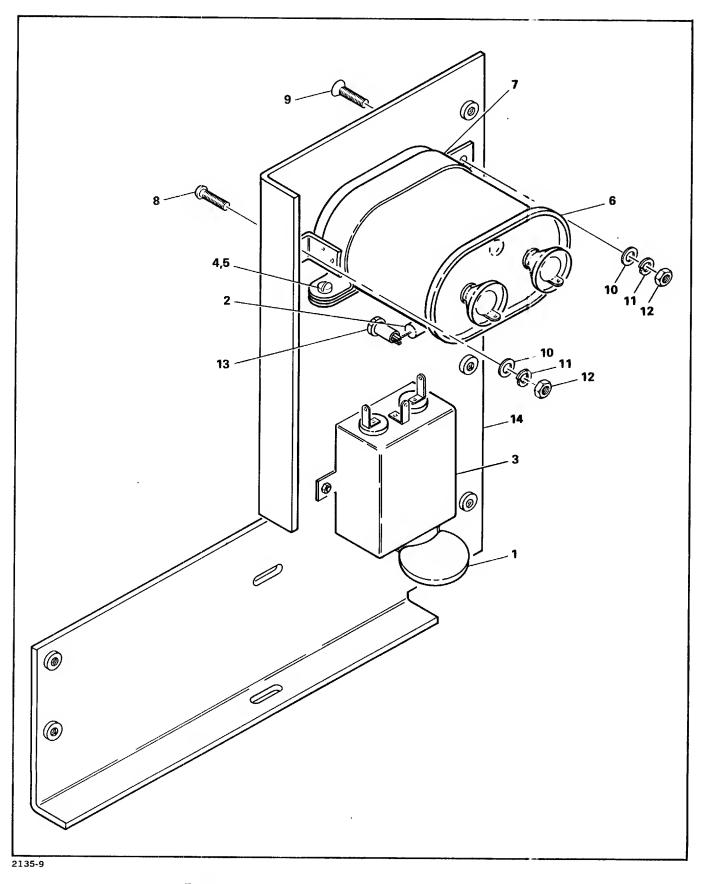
Plenum Chamber Side Bracket, Exploded View
